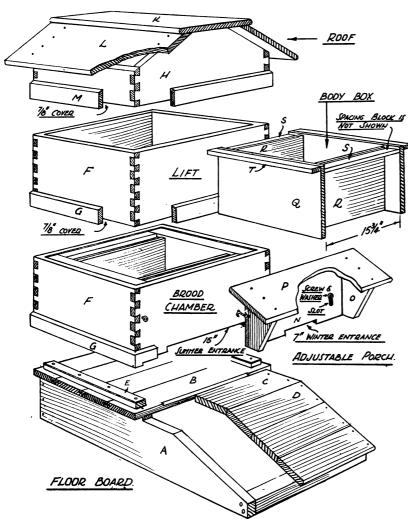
THE COMPONENT PARTS AND HOW THEY ARE ASSEMBLED.
